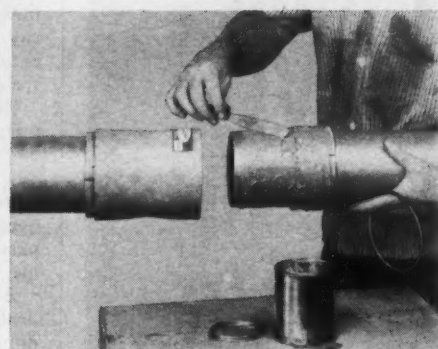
Locking wedge is slid over pipe and covered with epoxy adhesive. O-ring goes on pipe end
